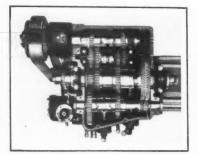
Arrangement of the Headstock Gears on the Boye & Emmes Lathe
